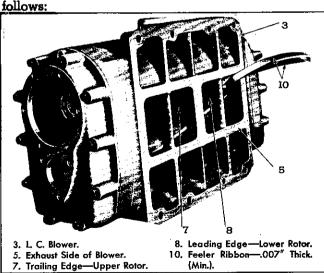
Measuring End Clearance Between Blower Rotors and Housing.
